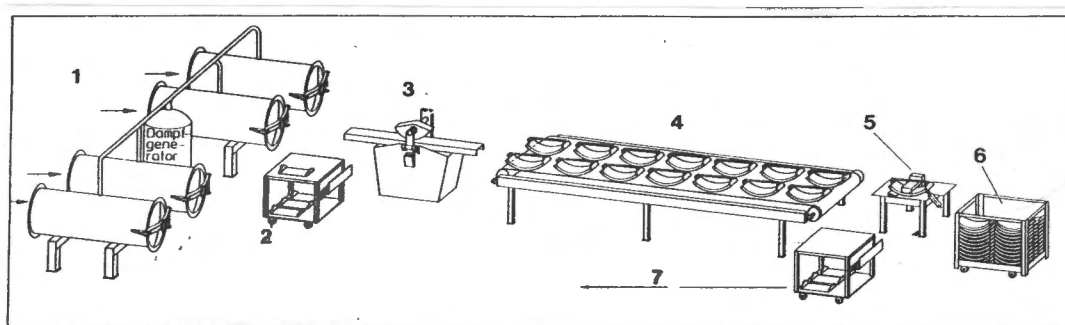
Conceptional lay out of a complete bending line: 1 *steam generator with steam tanks*; 2 *mobile working desk*; 3 *bending machine*; 4 *stabilising line*; 5 *clamp release device*; 6 *frame carrier for drying chamber*; 7 *carrier going back*.
